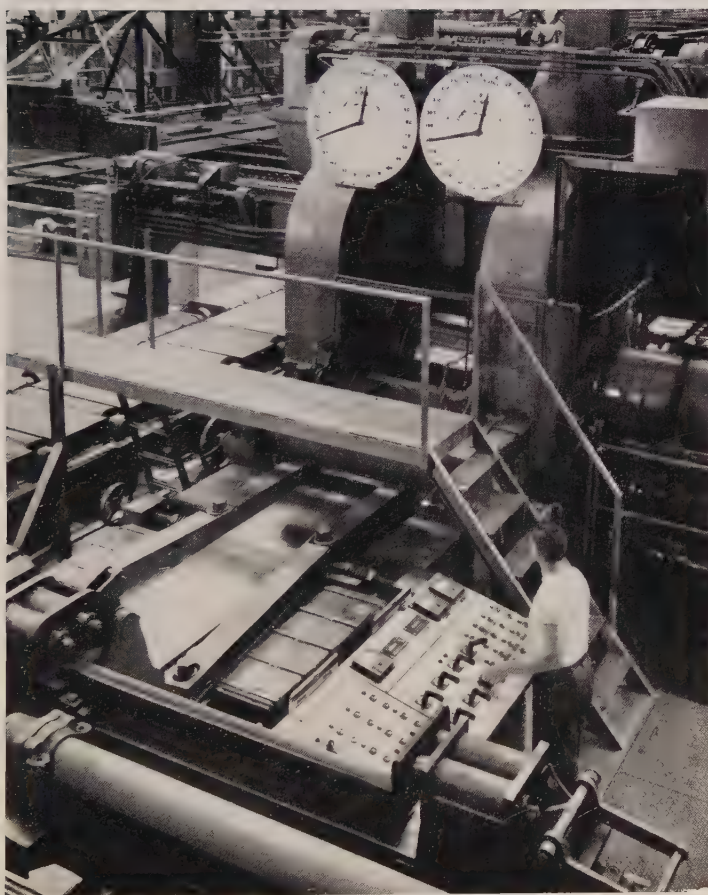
Two-High Cold-Rolling Mill, 30 × 36 in.
